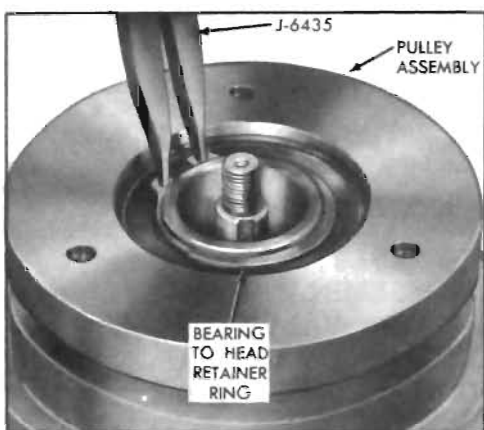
Removing or Installing Bearing to Head Retainer Ring
